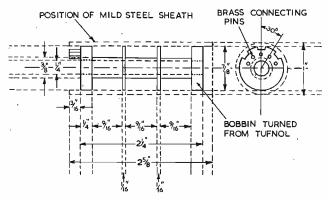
Dimensions of differential transformer gauge bobbins and sheath
